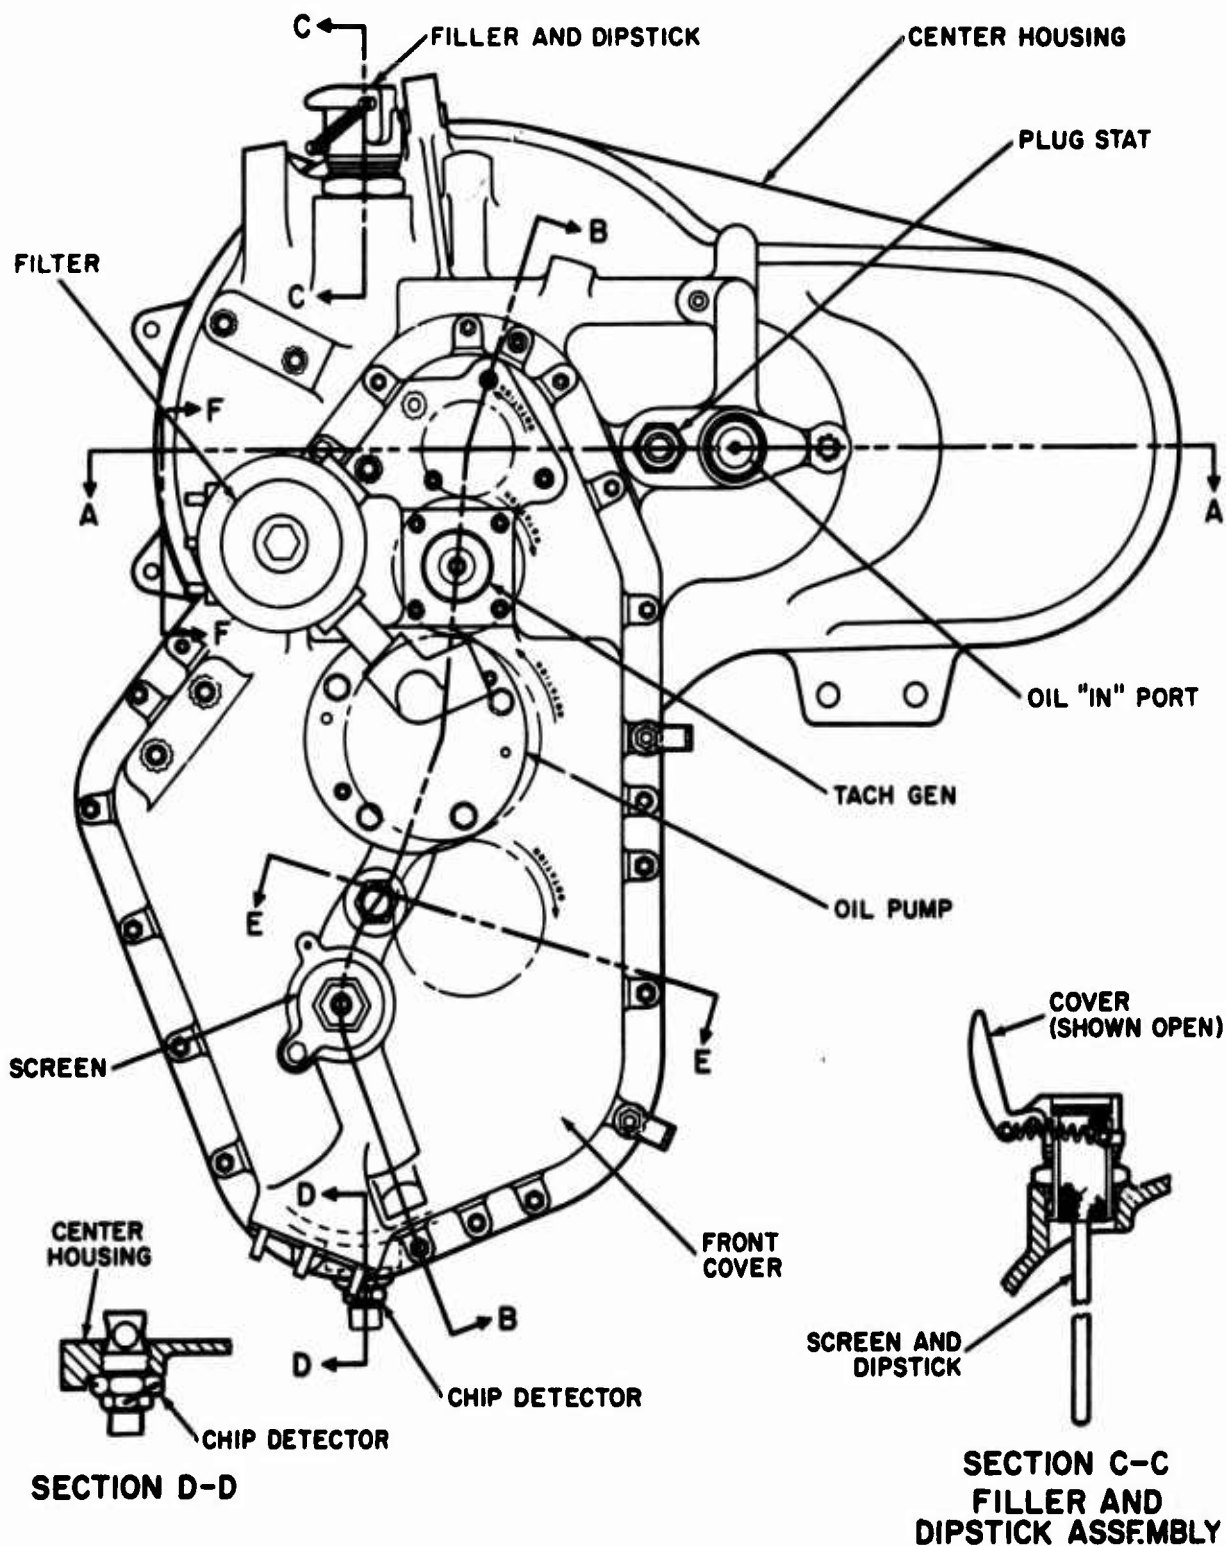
CH-53 Nose Gearbox - Front View (Left-Hand Shown - Right-Hand Opposite).
